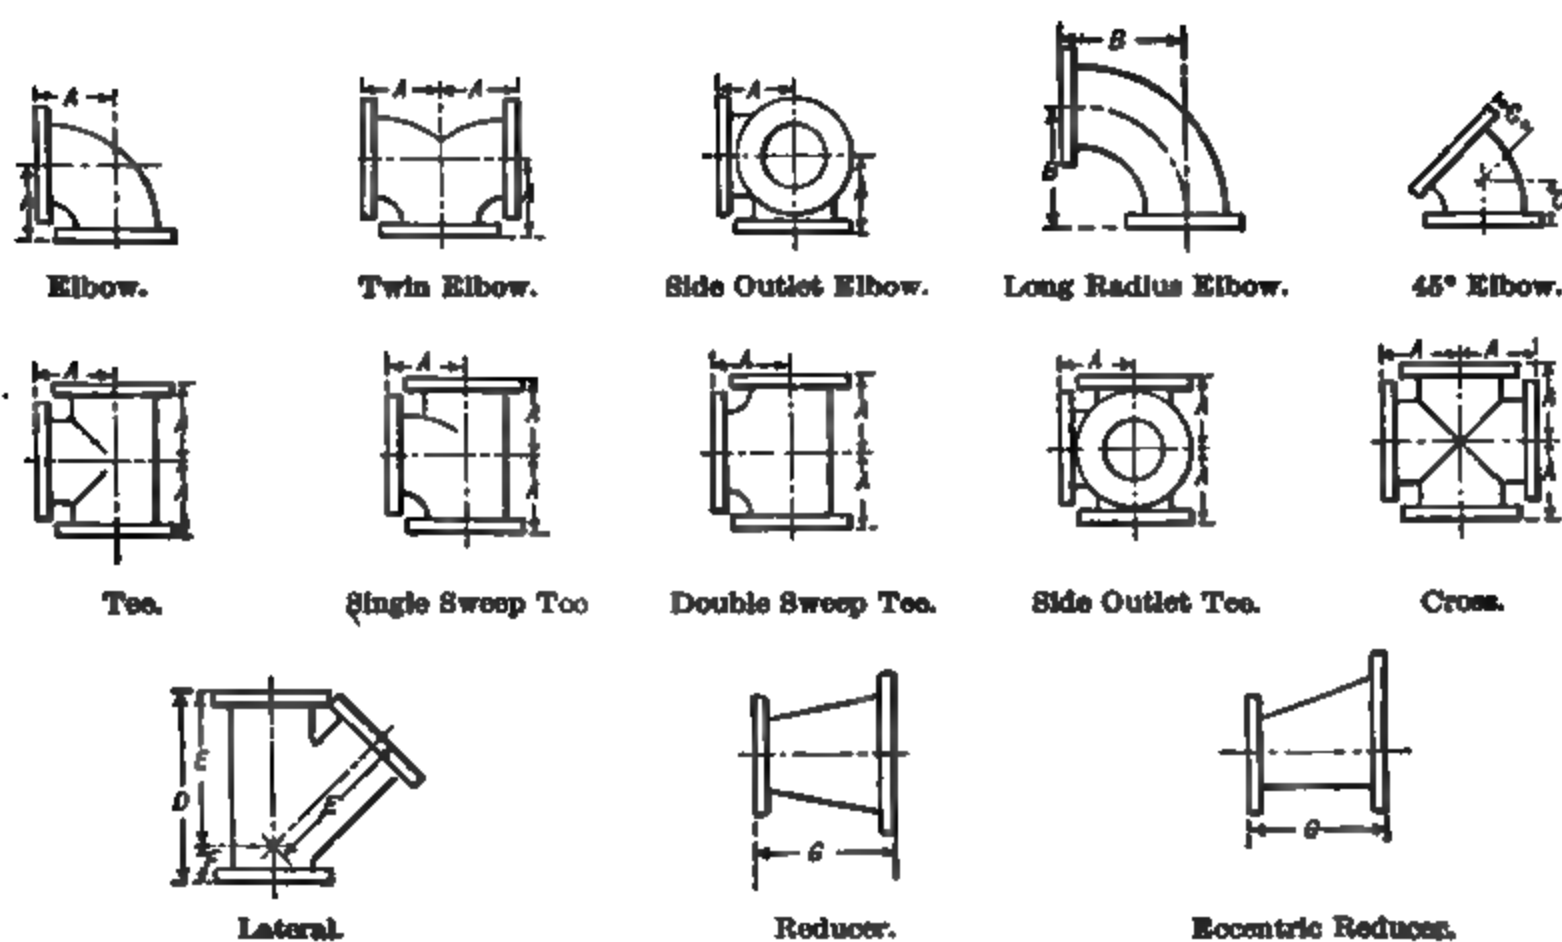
STANDARD AND EXTRA HEAVY FLANGED FITTINGS
